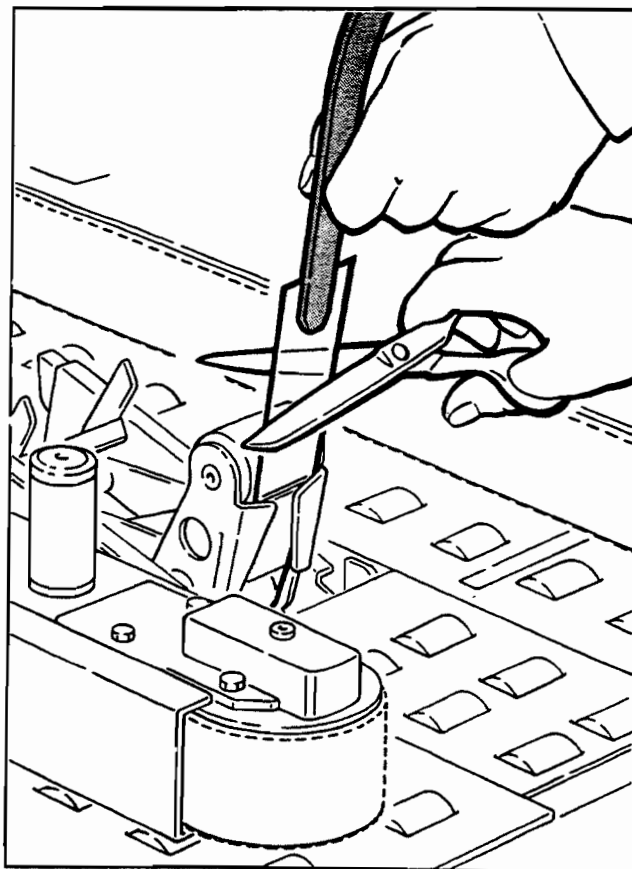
800a/800a3/800ab - Lower Taping Head
